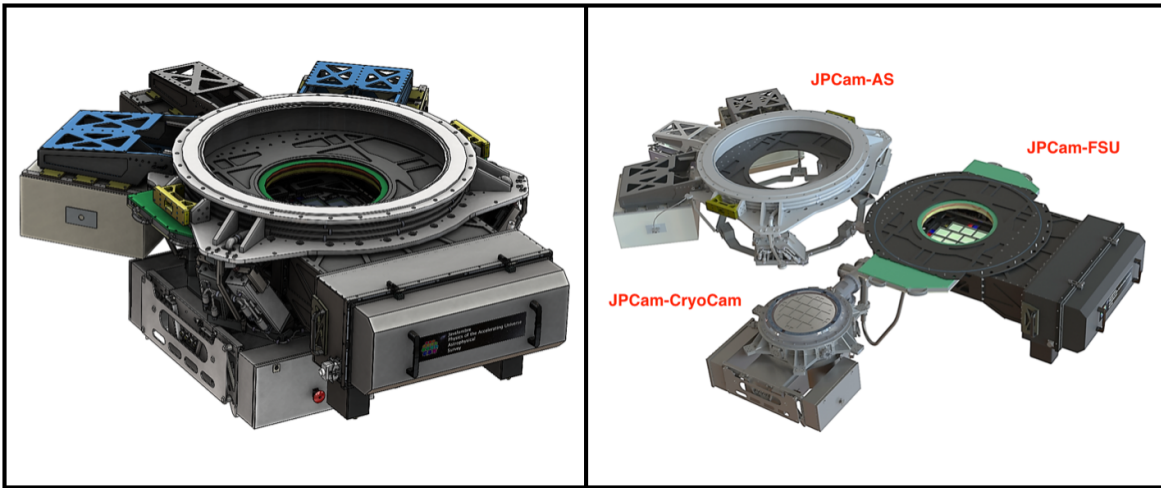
JPCam 3D model design. Left panel shows a fully assembled JPCam while in the right panel shows a deployed view identifying the three main subsystems.
